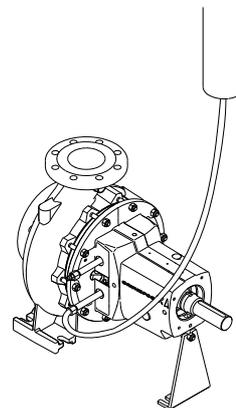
Tandem seal arrangement with a dead-end flushing-liquid supply
